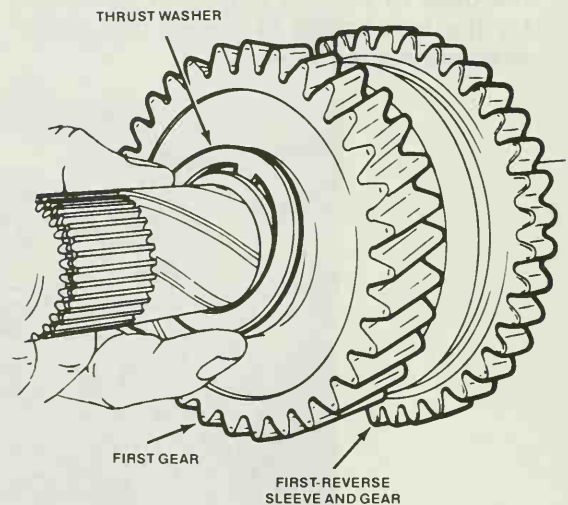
Installing first gear thrust washer on mainshaft or output shaft. (American Motors Corporation)
